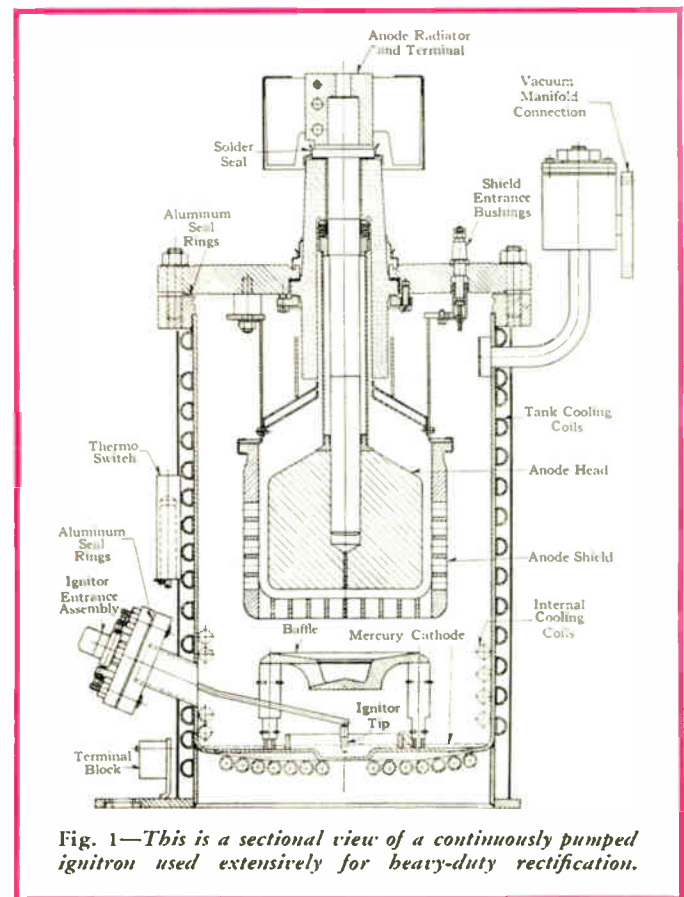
This is a sectional view of a continuously pumped ignitron used extensively for heavy-duty rectification.
